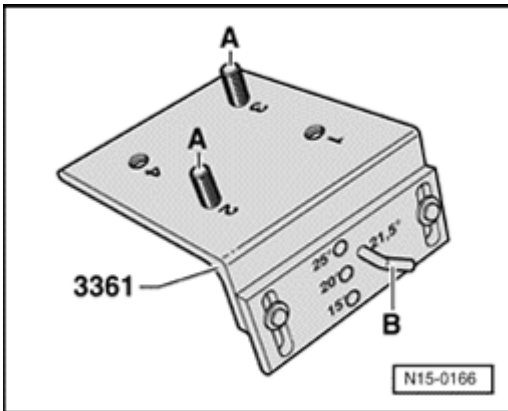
Inserting Locating Pins For Cylinder Head Bolt Holes In Appropriate Holes
